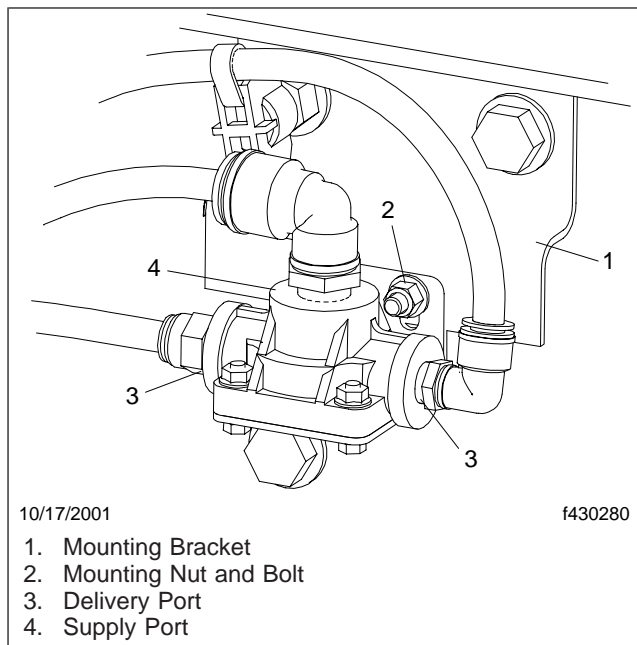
, Quick Release Valve Mounting (QR-1 valve shown)
